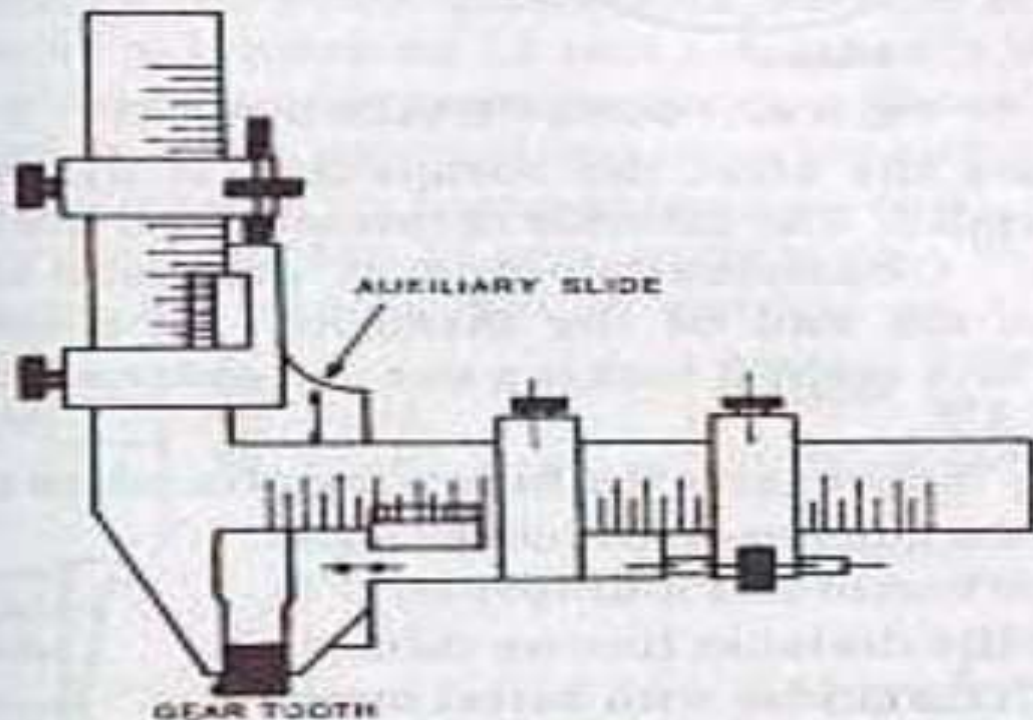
GEAR TOOTH VERNIER CALIPER
